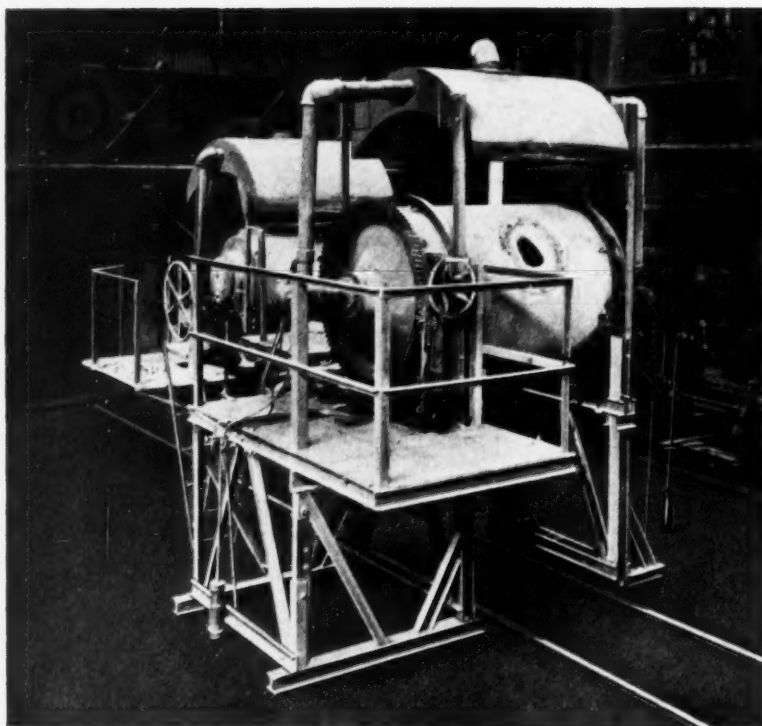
Rotary Oil-fired Furnace which Supplies Molten Cast Iron in Sufficient Quantity for the Economical Operation of Cast-iron Die-casting Machines
